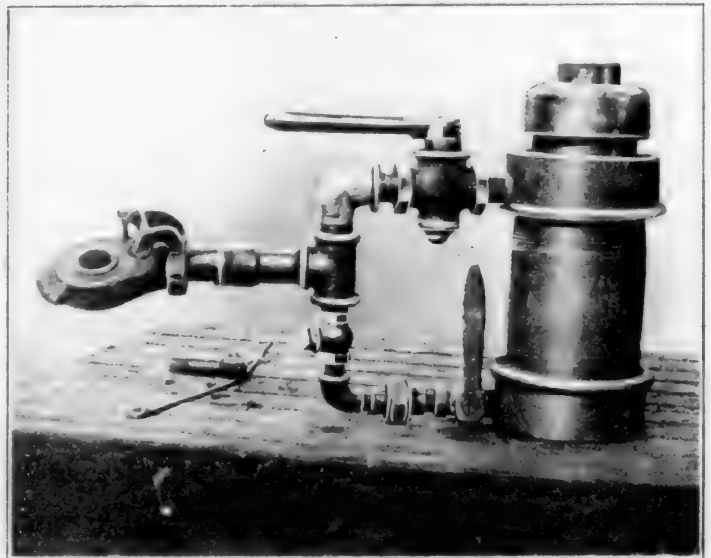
PNEUMATIC HAMMER FOR REMOVING FRAME BOLTS.
